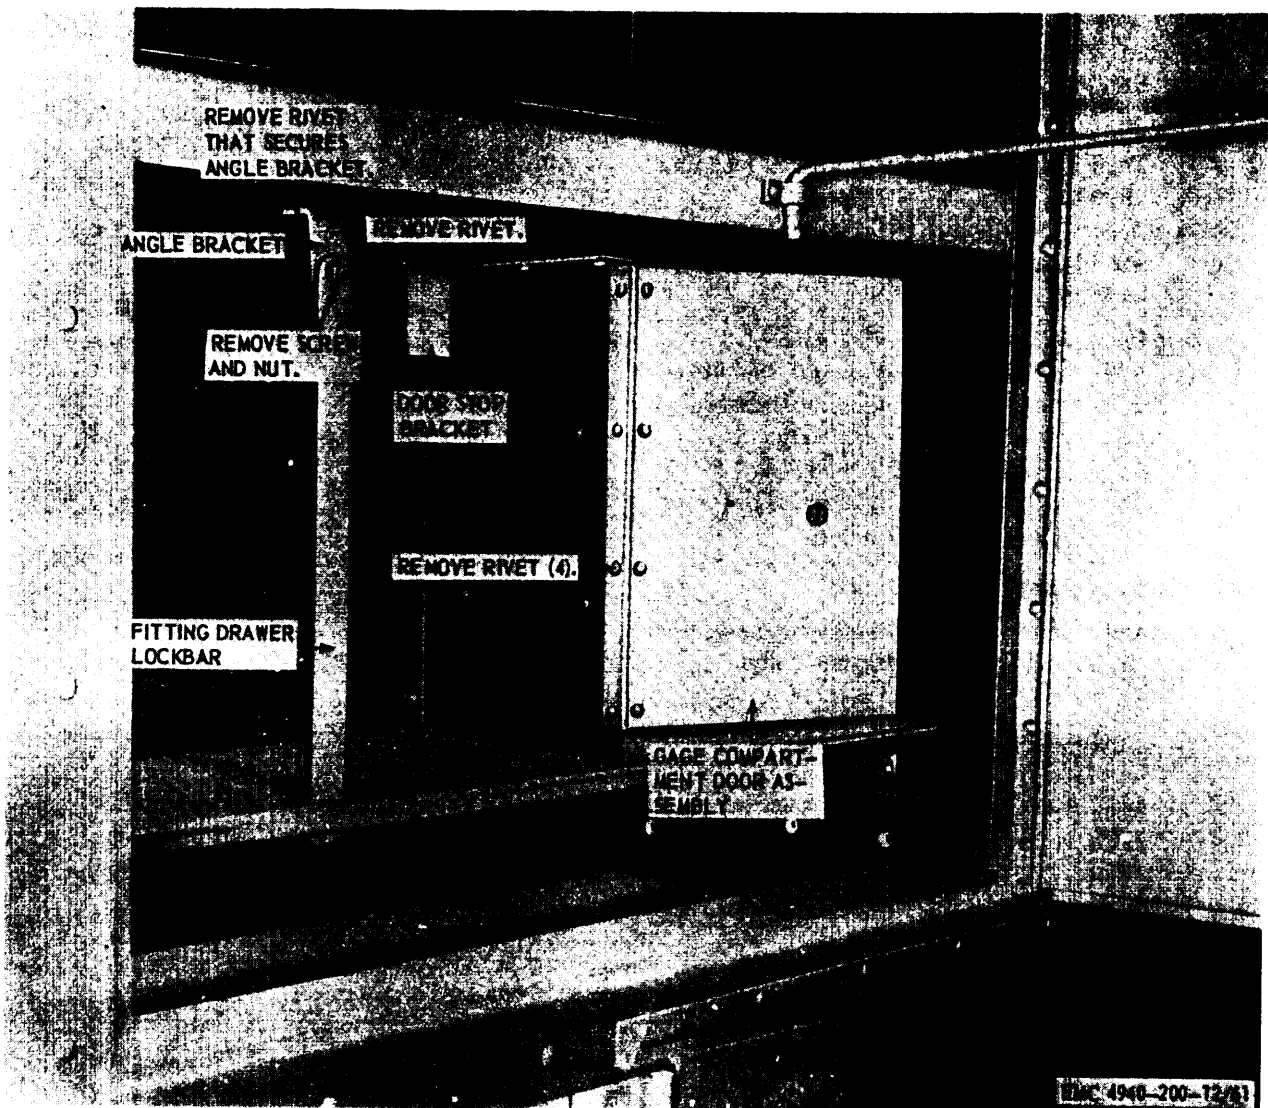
Gage compartment door, door stop bracket, and fitting drawer lockbar, Model SECM, removal and installation.
